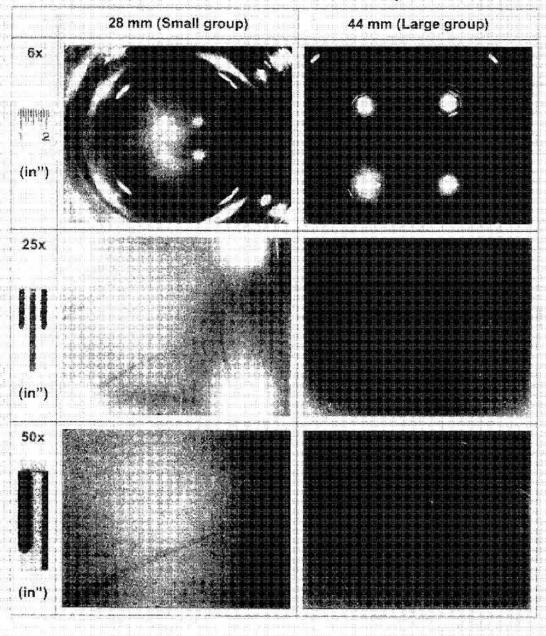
Typical Head Surfaces After 6-million Cycles Test
